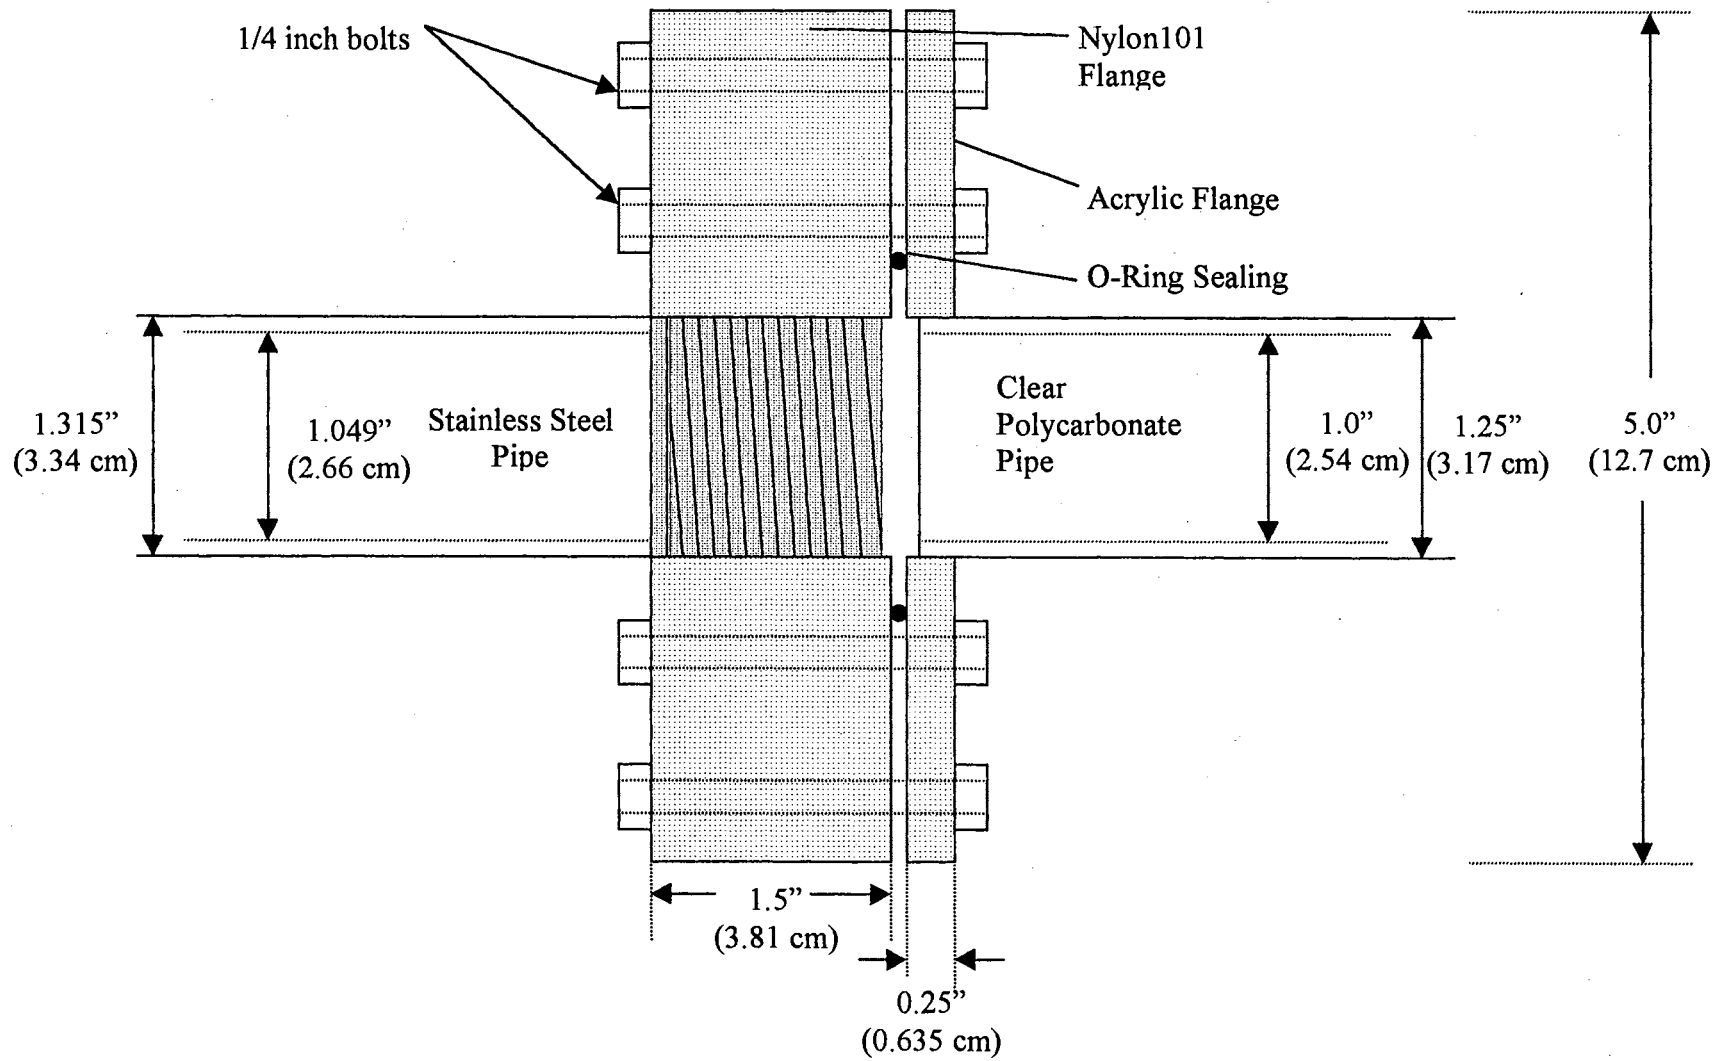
Flange Connection between Stainless Steel Pipe and Calming Section
